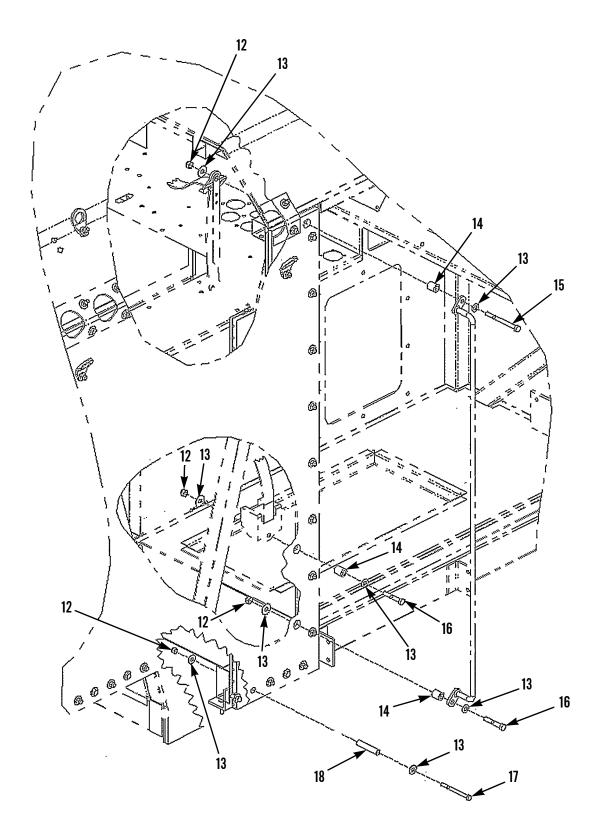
Right Side Panel Armor Kit and Mounting Hardware (Sheet 2 of 2)
